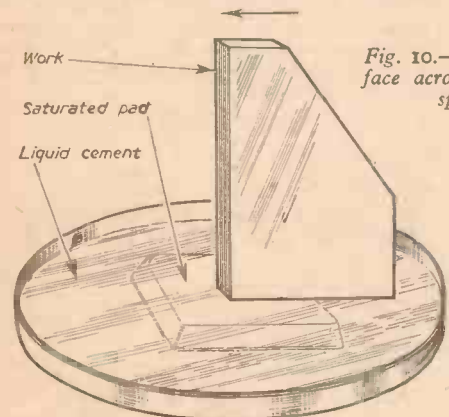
(Left) Wiping joint face across saturated pad to spread cement.
